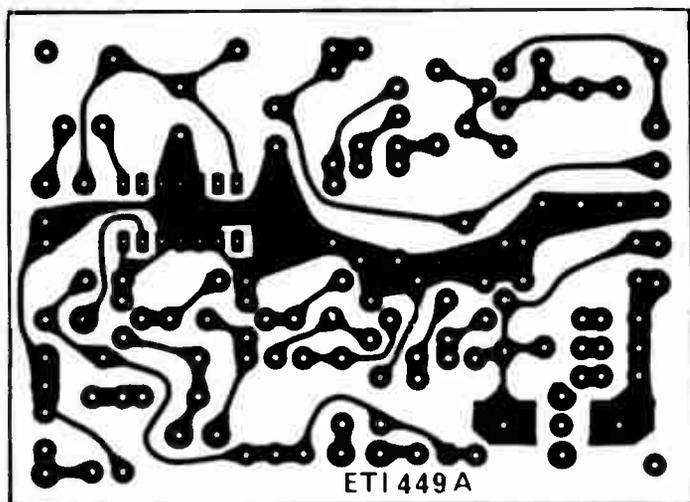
Printed circuit layout. Full size 90 x 65 mm.
